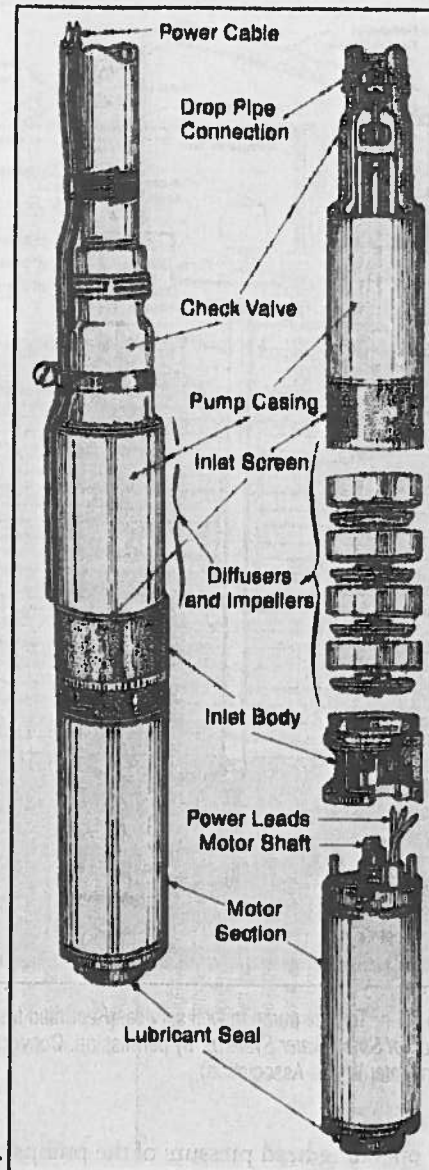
View of a multistage submersible pump. (Reprinted from *Design and Construction of Small Water Systems*, by permission. Copyright © 1999, American Water Works Association).
